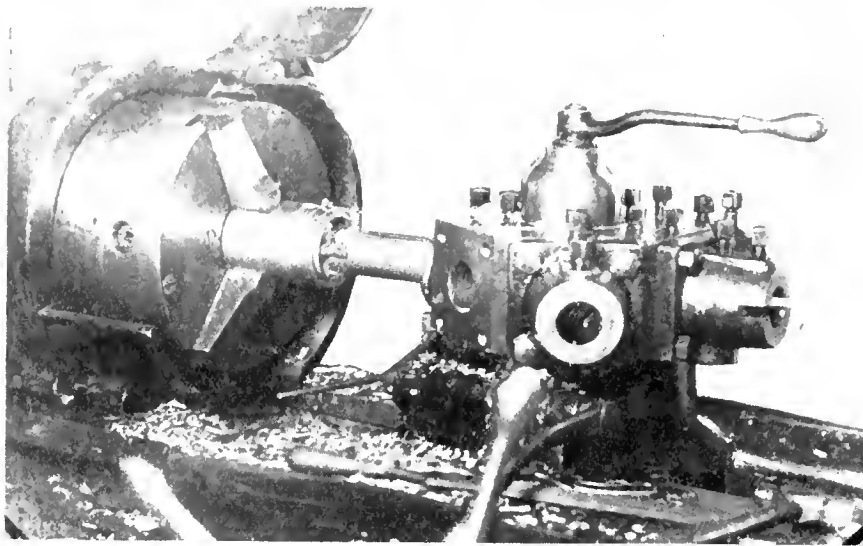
SINGLE PURPOSE LATHE RECESSING SHELL BASES.
